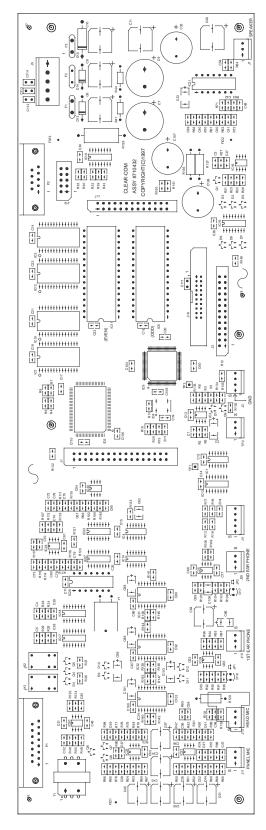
Assembly Drawing—ICS-2003 Main PCB
